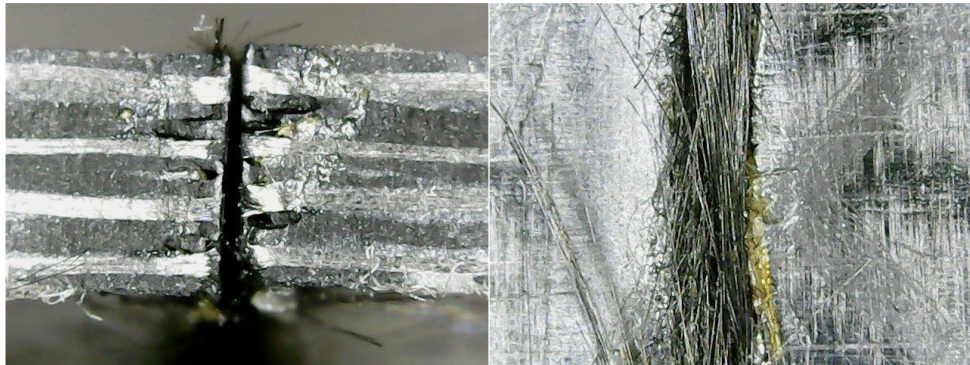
Microscope images of edge side (left) and top side (right) of laser cutting test 70.
